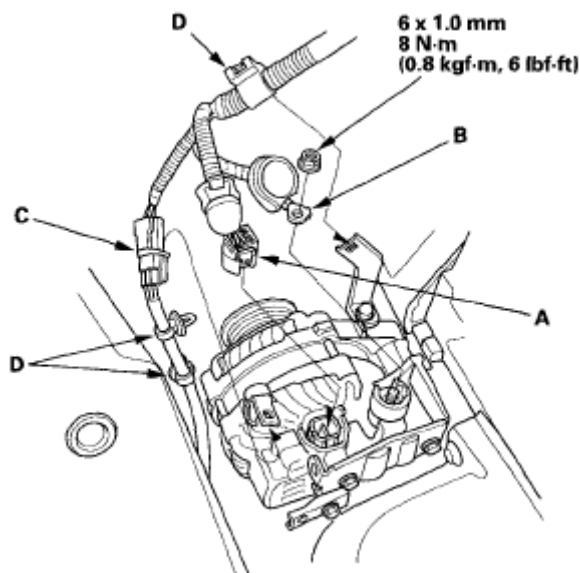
Identifying Alternator Connector And BLK Wire To Alternator
